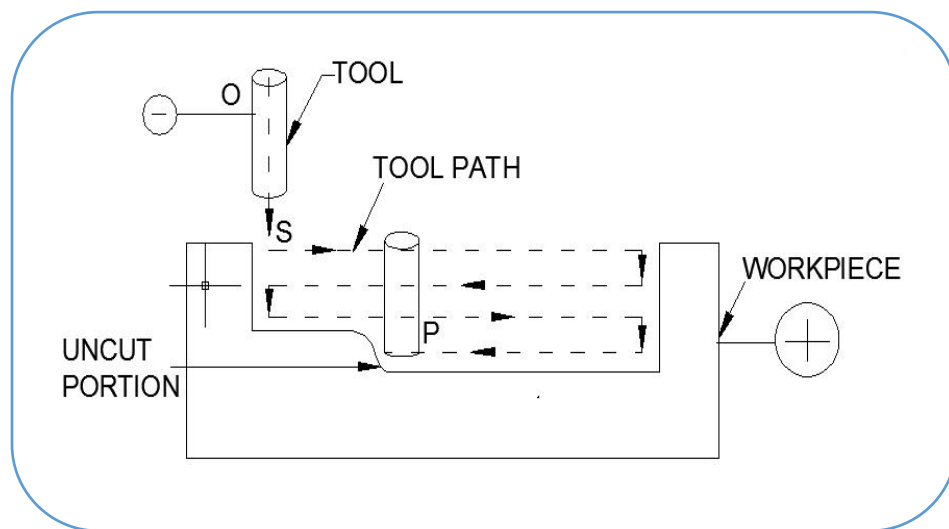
Tool path followed by cylindrical tool in EC milling
